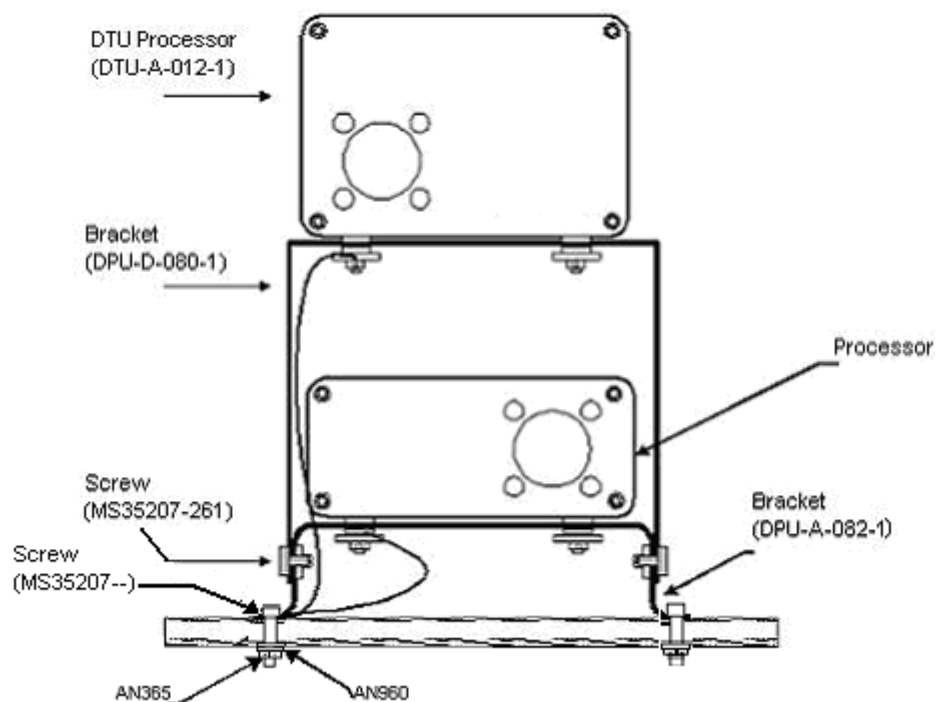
“Double Stack” Mounting Configuration – Metal Skin
